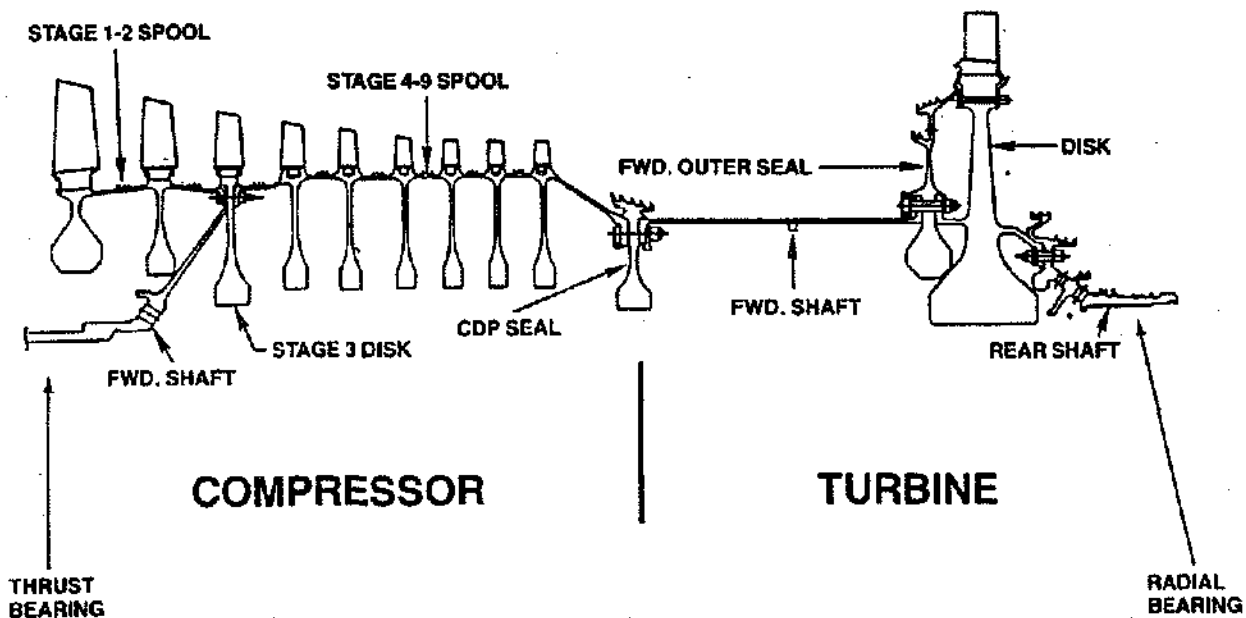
CFM56-3 High Pressure Rotor Bearing Support
